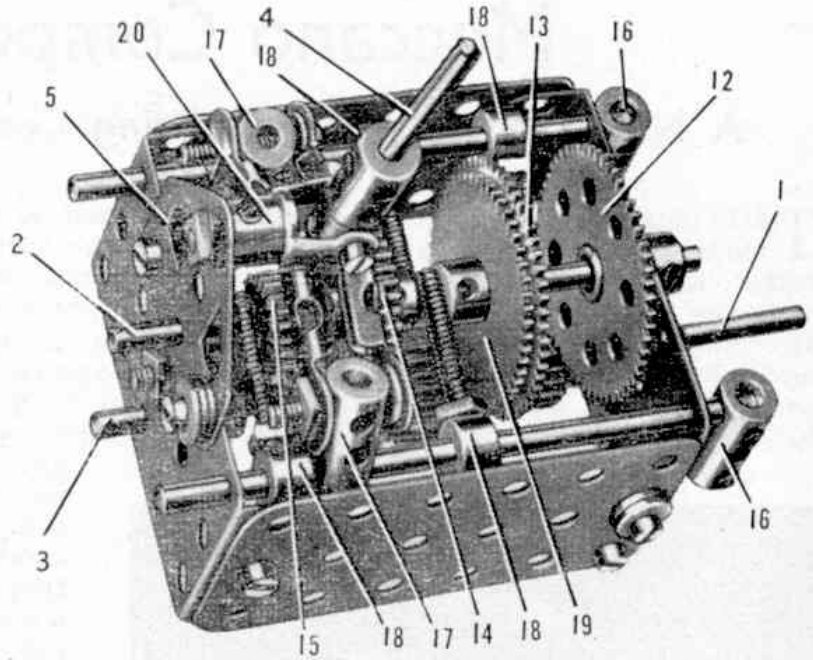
A three-speed and reverse gear-box that makes use of the new Rod with Keyway, Part No. 230.
